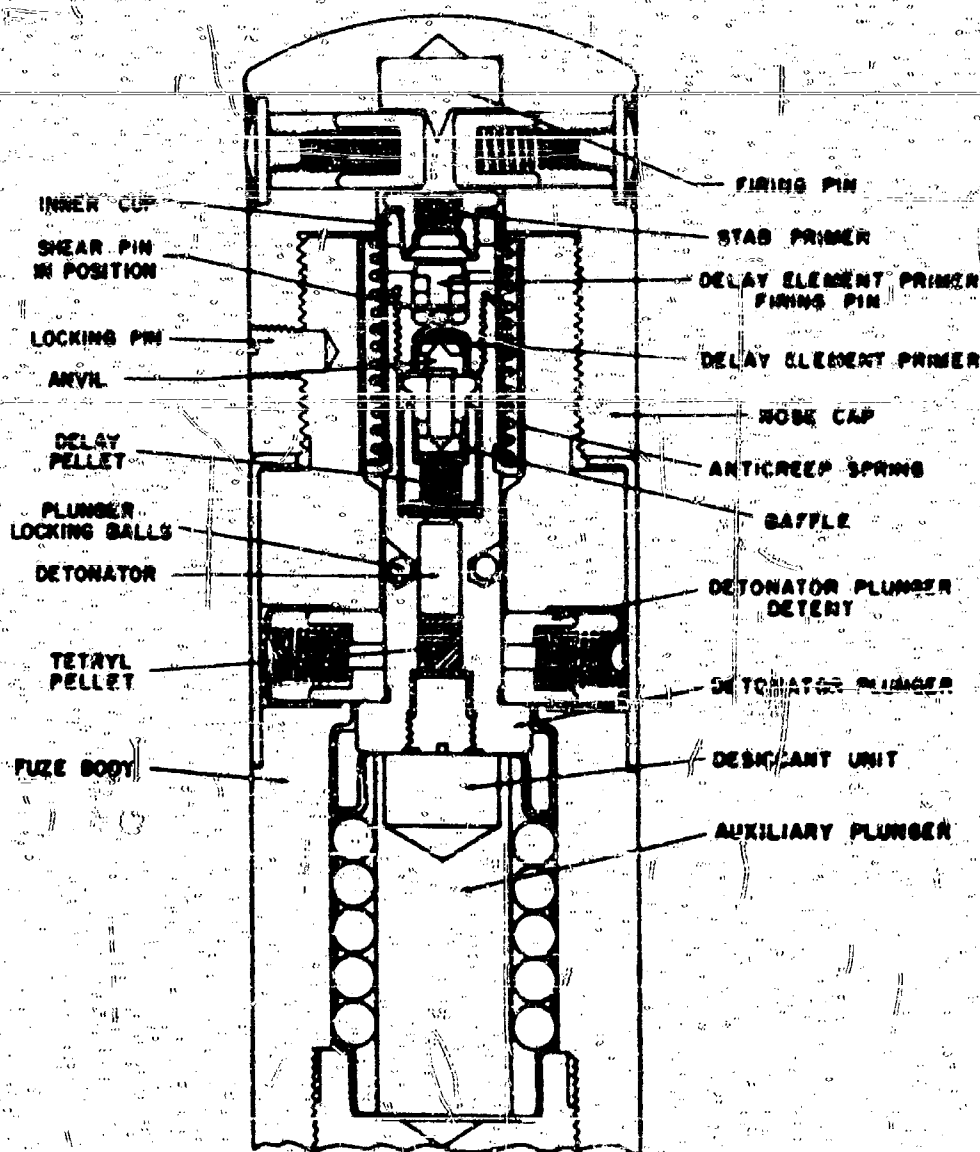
Base Fuze Mk 21, Assembled Position. Sectional View.
